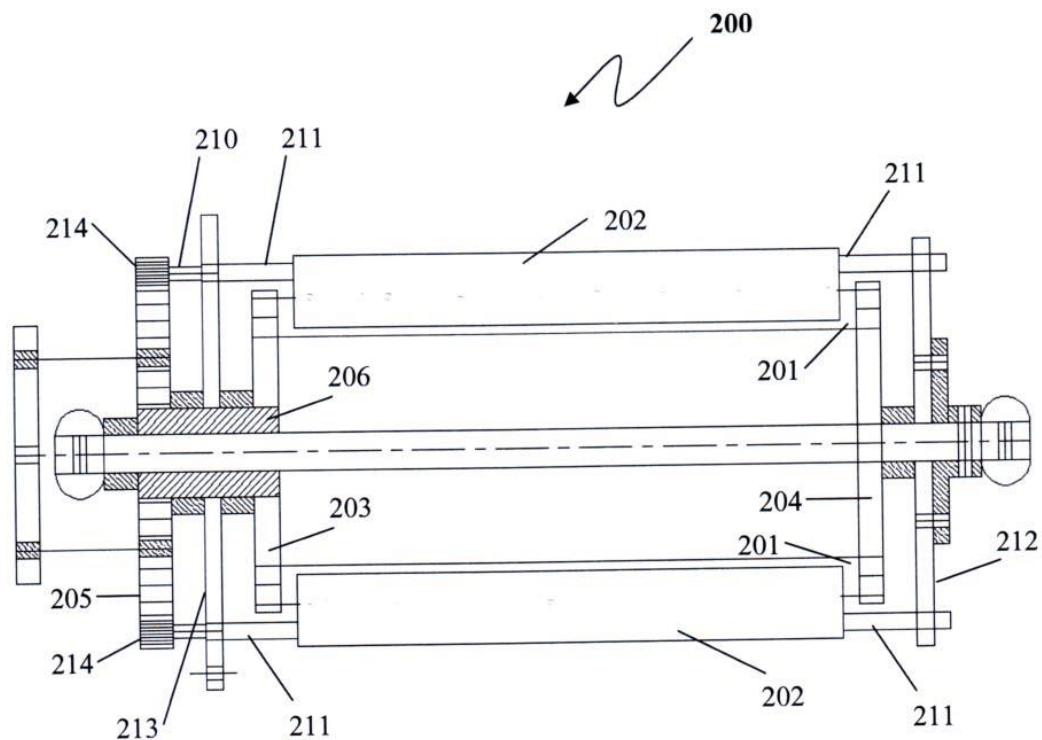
Cross-section view of the mandrel that shows the assembly parts in detail
